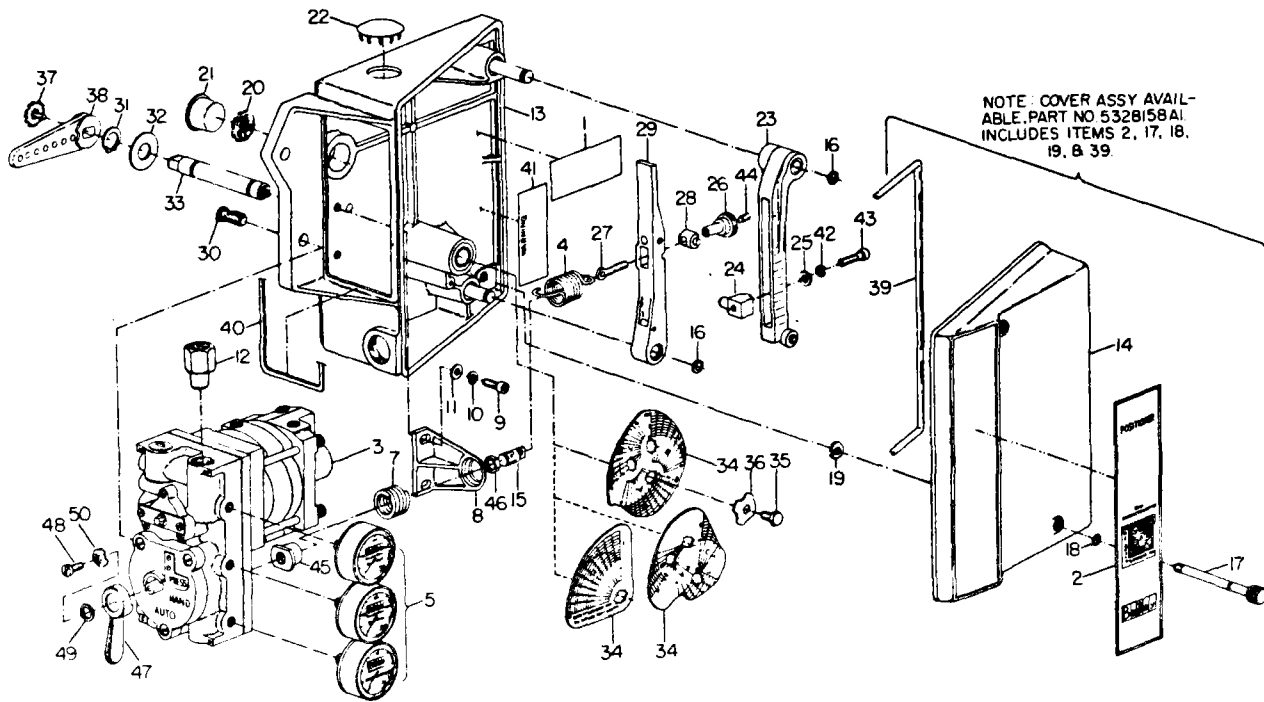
is a parts drawing of the Type AP2 Characterizable Pneumatic Positioner. Figure 23 is a parts drawing of the Positioner Assembly.
